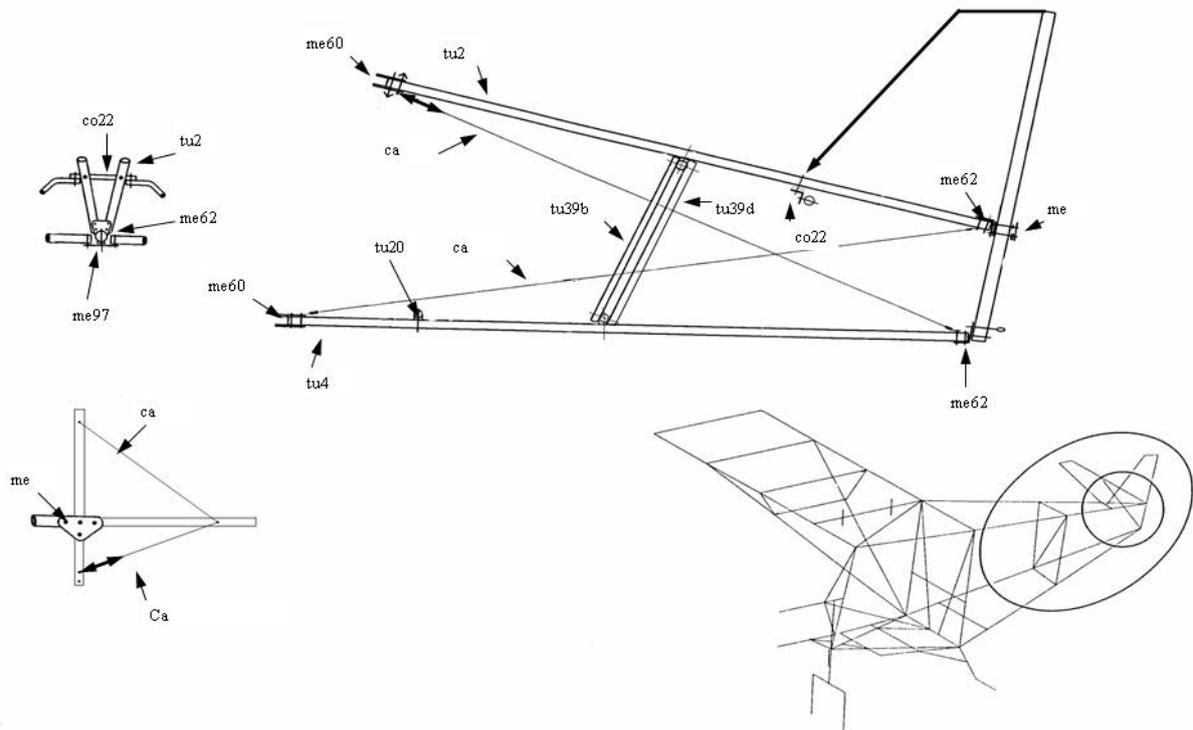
; rear fuselage. Top left is top view of tailplane attachments, bottom left is rear view of half tailplane and fin.
